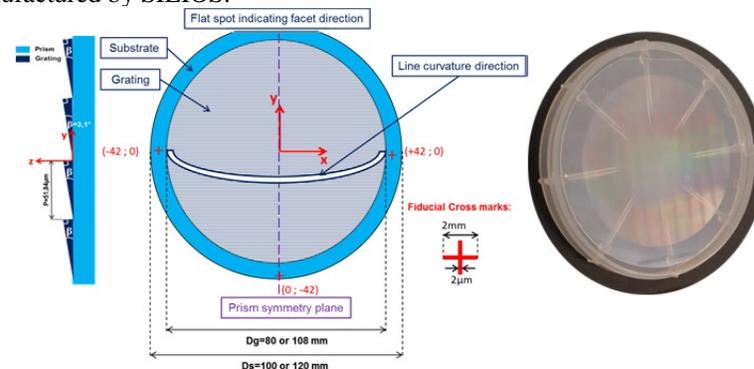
Gratings side and face layouts with dimensions required (left) and photo of the real 80mm diameter grating manufactured by SILIOS.
